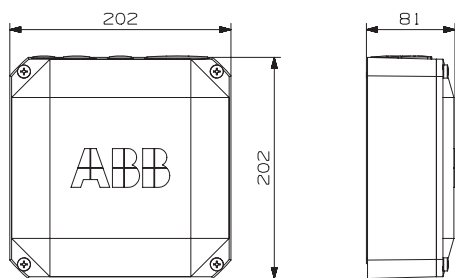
Motor sizes 100 – 160, standard design with 3 terminals
